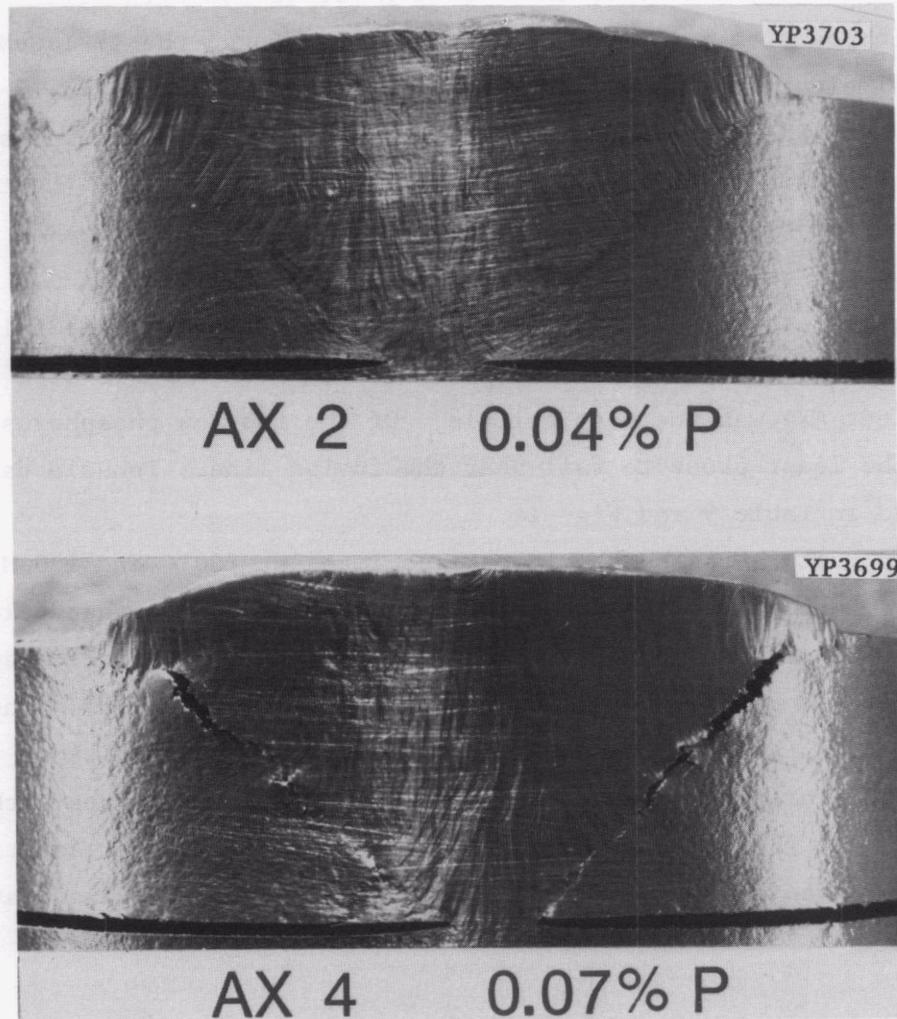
Side bend test samples of weldments in heats AX2 and AX4.
